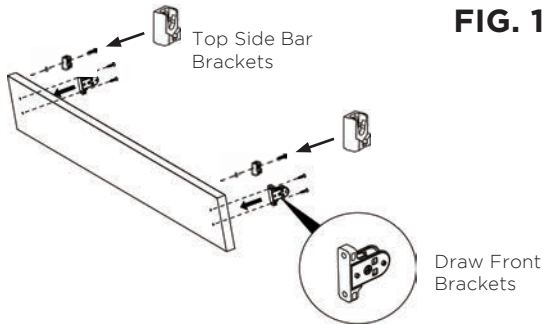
Fit the drawer front brackets and top side bar brackets using the screws provided.
